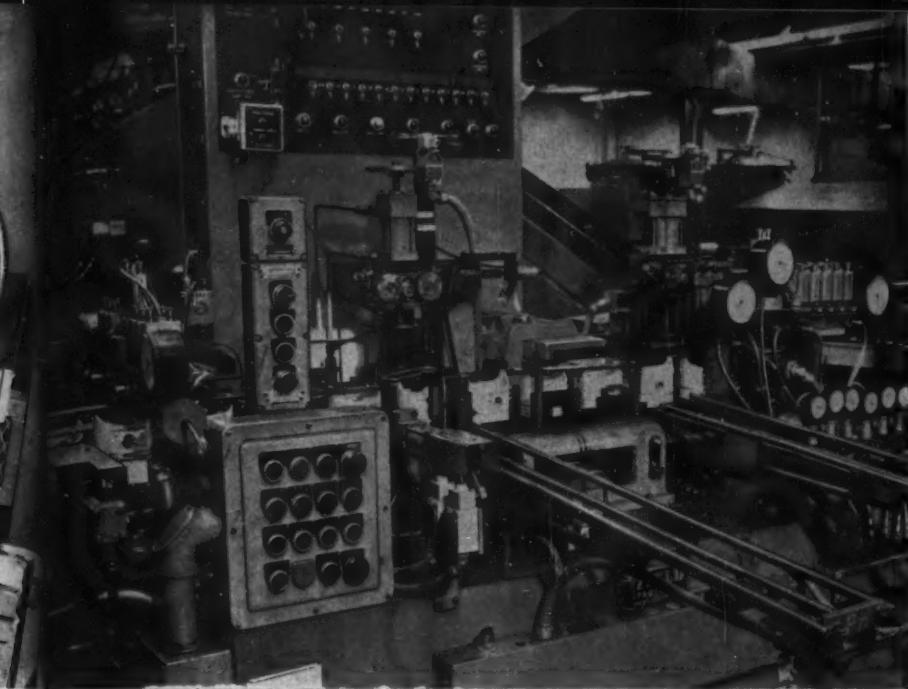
Automatic gaging and segregating machine checks various dimensions of the piston grooves, lands, skirts, and heads.
